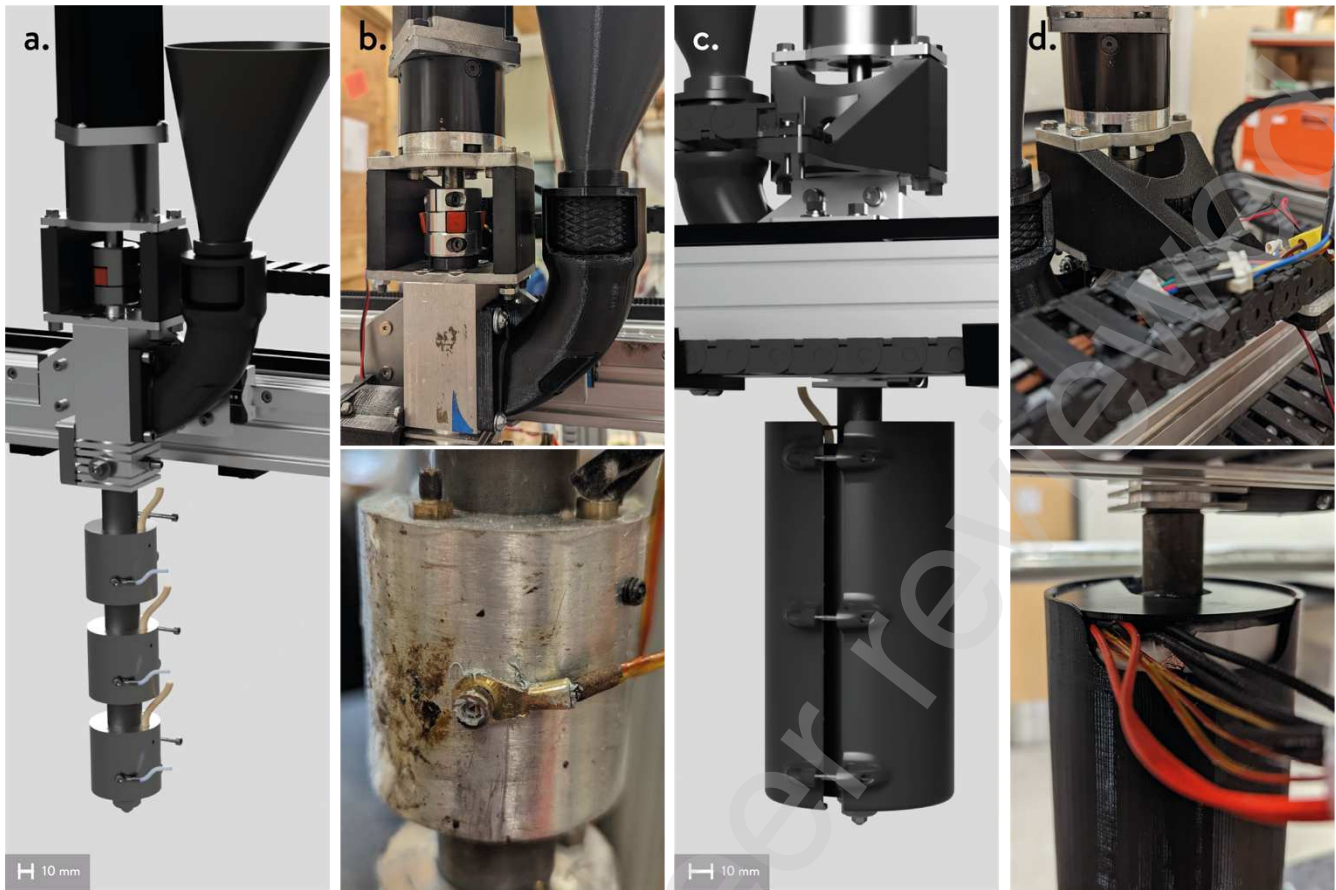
New version of the GigabotX extruder: (a) preview of the assembly without insulation; (b) insight on the feeding system and thermocouple fixing; (c) preview of the assembly with insulation; and (d) insight on the motor support and insulation cover.
